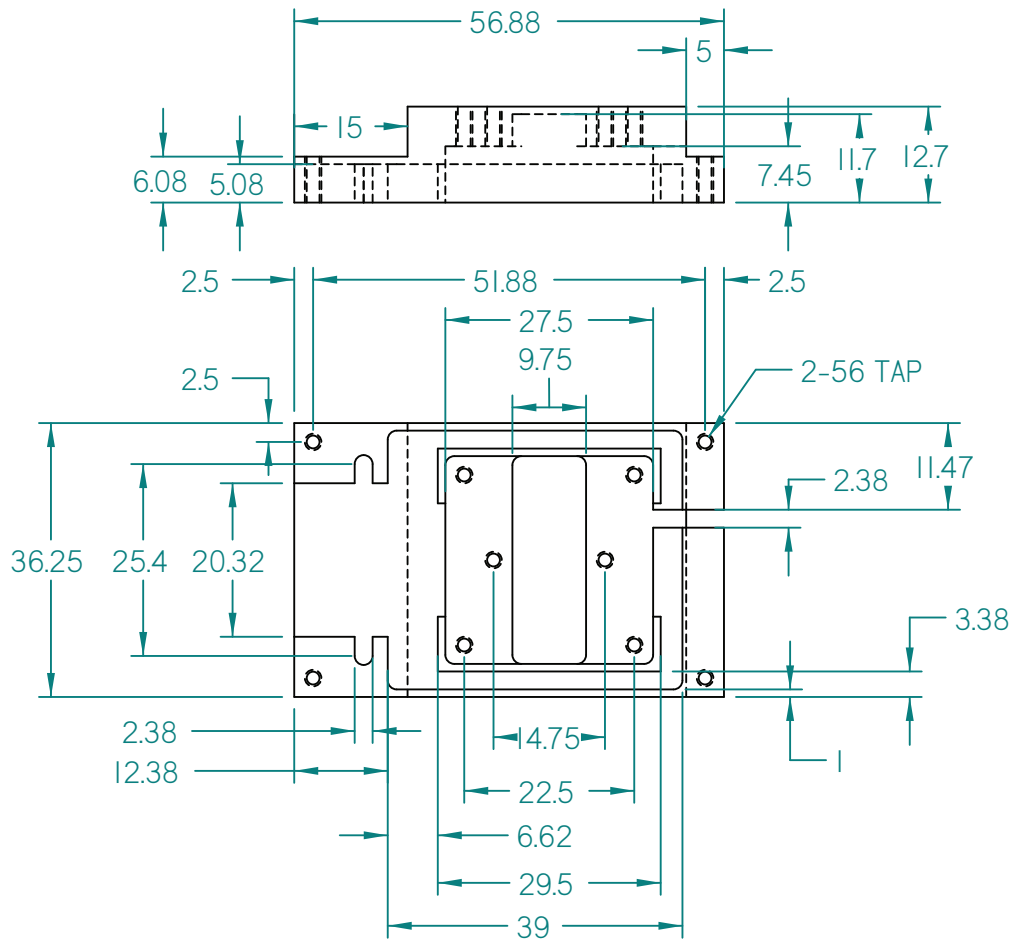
Long core housing dimensions (mm). Material: Delrin. 1:1 scale.
